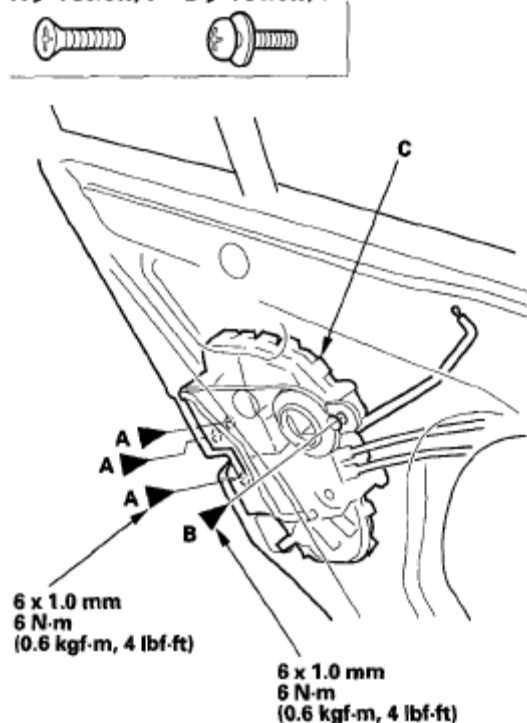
Removing Rear Door Latch Screws (With Specifications)
